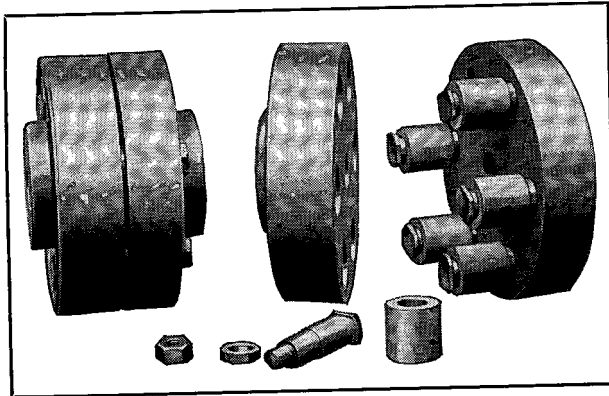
Pin and rubber bushing coupling. Assembled coupling is shown on left, exploded view on the right.
